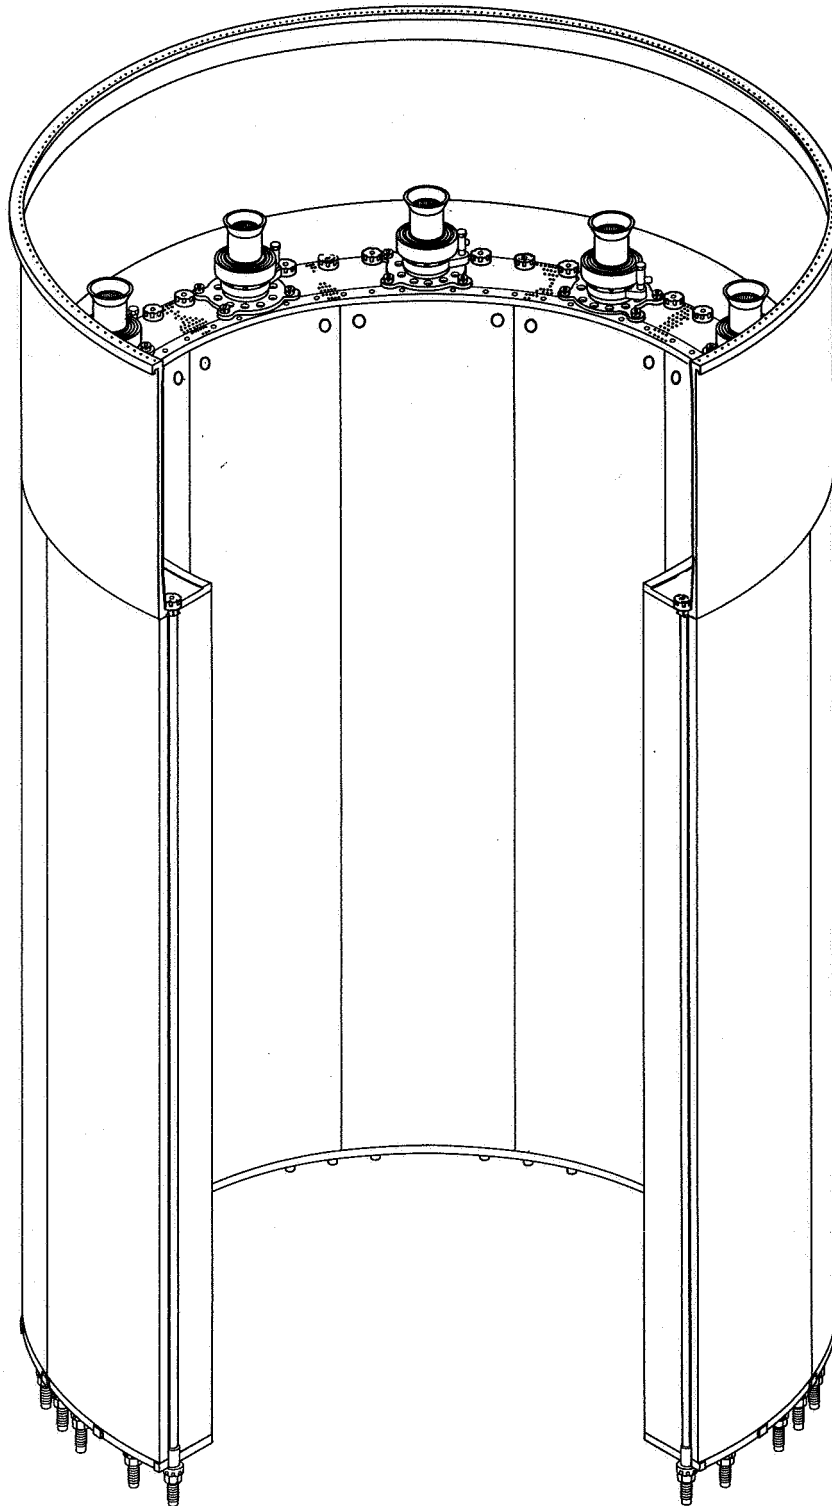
OUTER REFLECTOR ASSEMBLY
